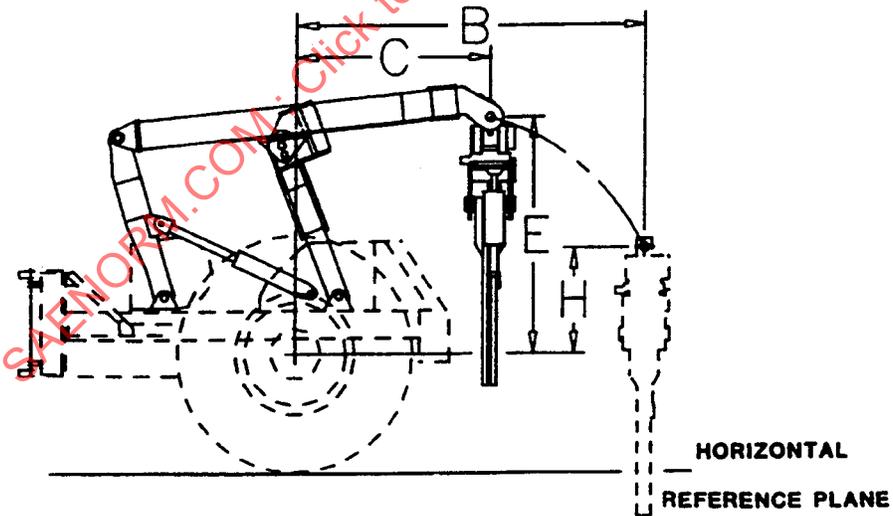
DUAL ARCH BOOM ASSEMBLY
